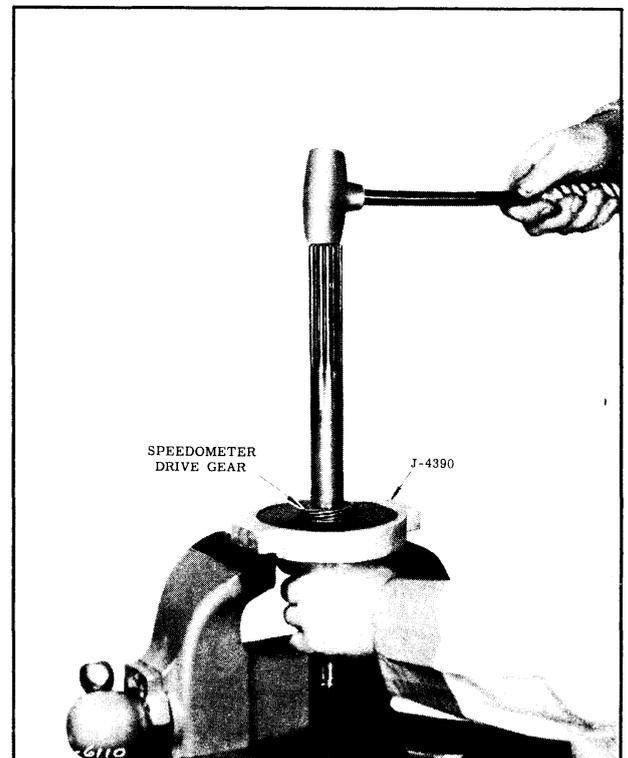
Removing Speedometer Drive Gear Using Tool J-4390
